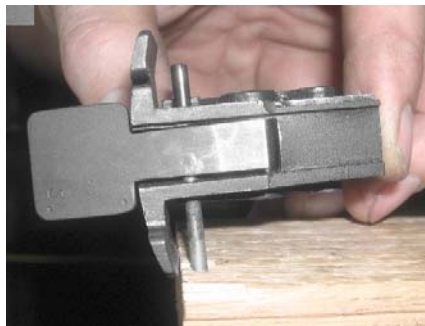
Pivot Pin Partially Inserted on Top and Taper Pin Shown Aligning the Mag Latch and Housing on Bottom
